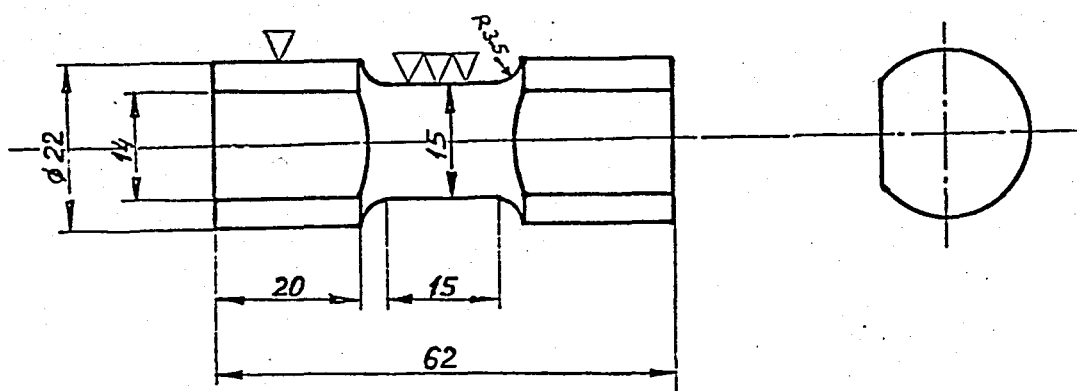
Hot-torsion Test Specimen (Dimensions are in mm.)
